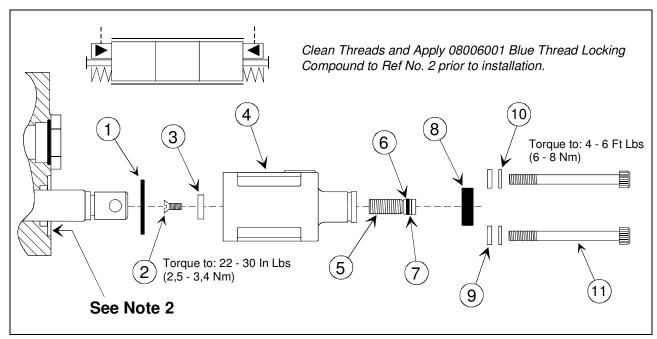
'HRO' Hydraulic Remote Spool Actuator (Spool Clevis End)
